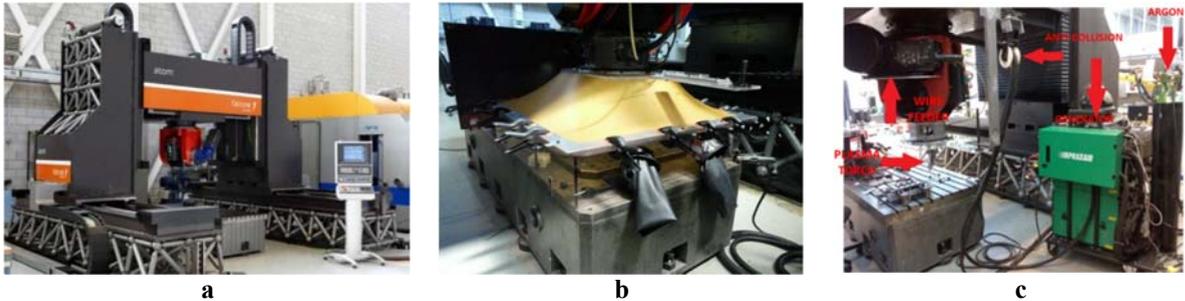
(a) General view of the machine; (b) Protective chamber; (c) Plasma equipment.
